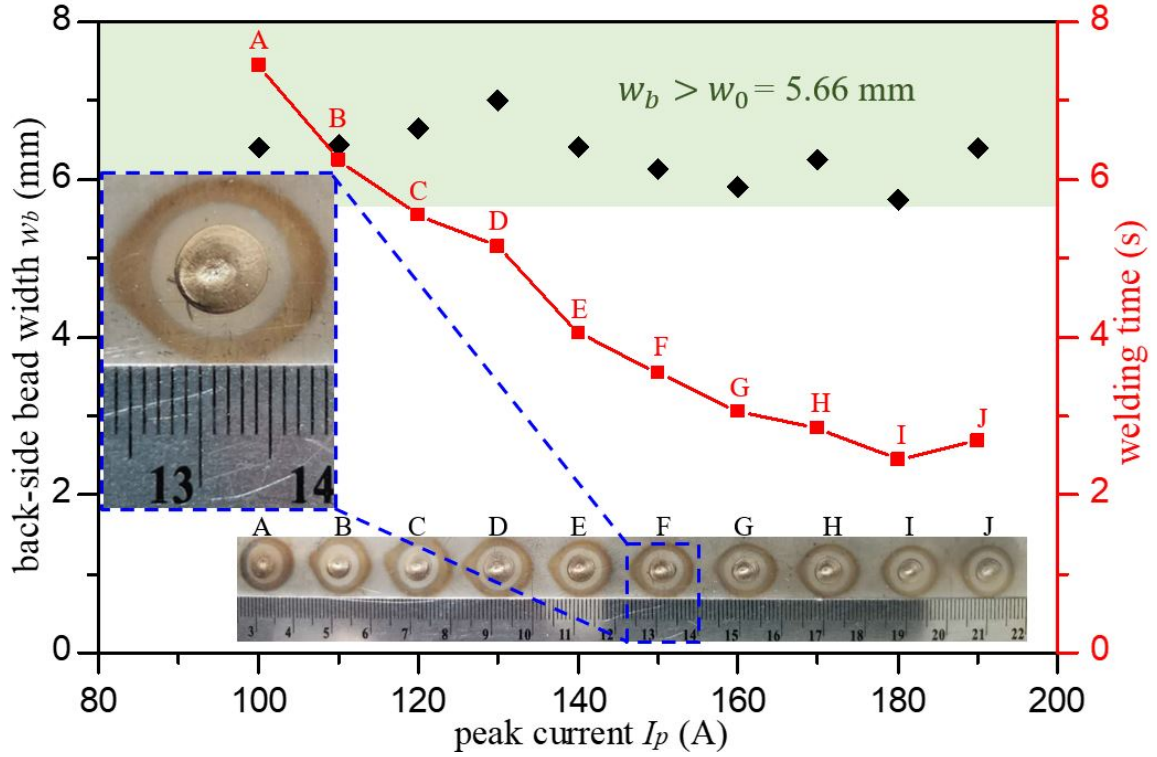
Controlled Weld Joint in Various Welding Conditions Based on CNN.
